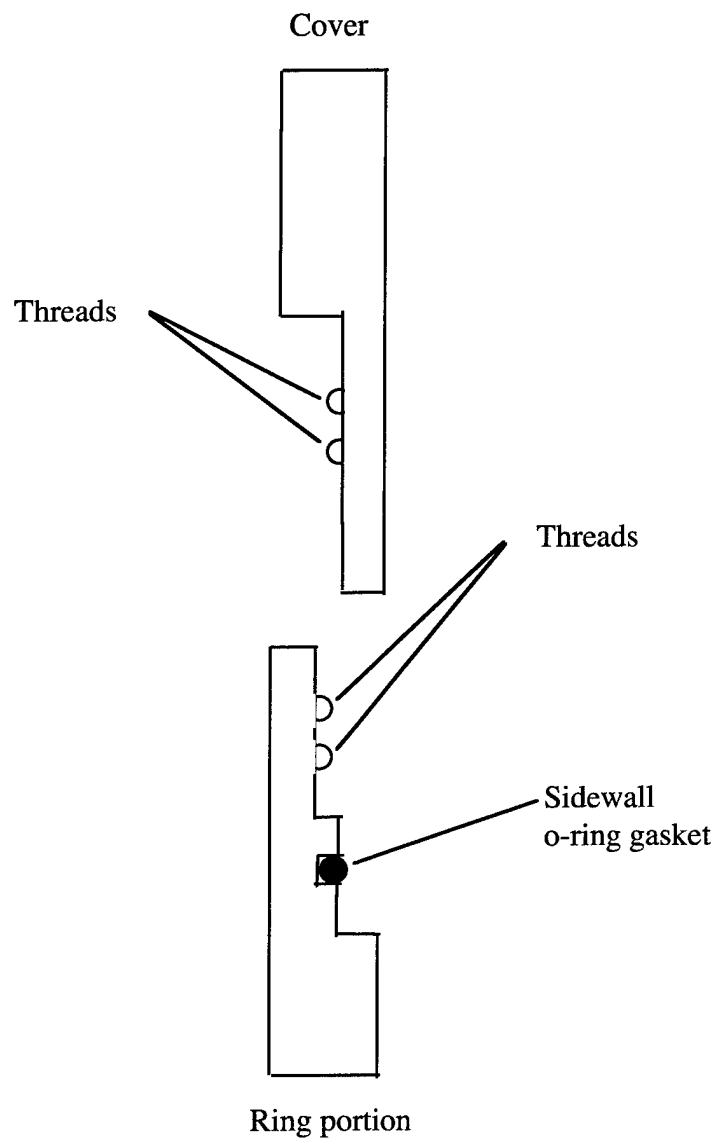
Sketch of cover cross-section showing sidewall gasket design.
